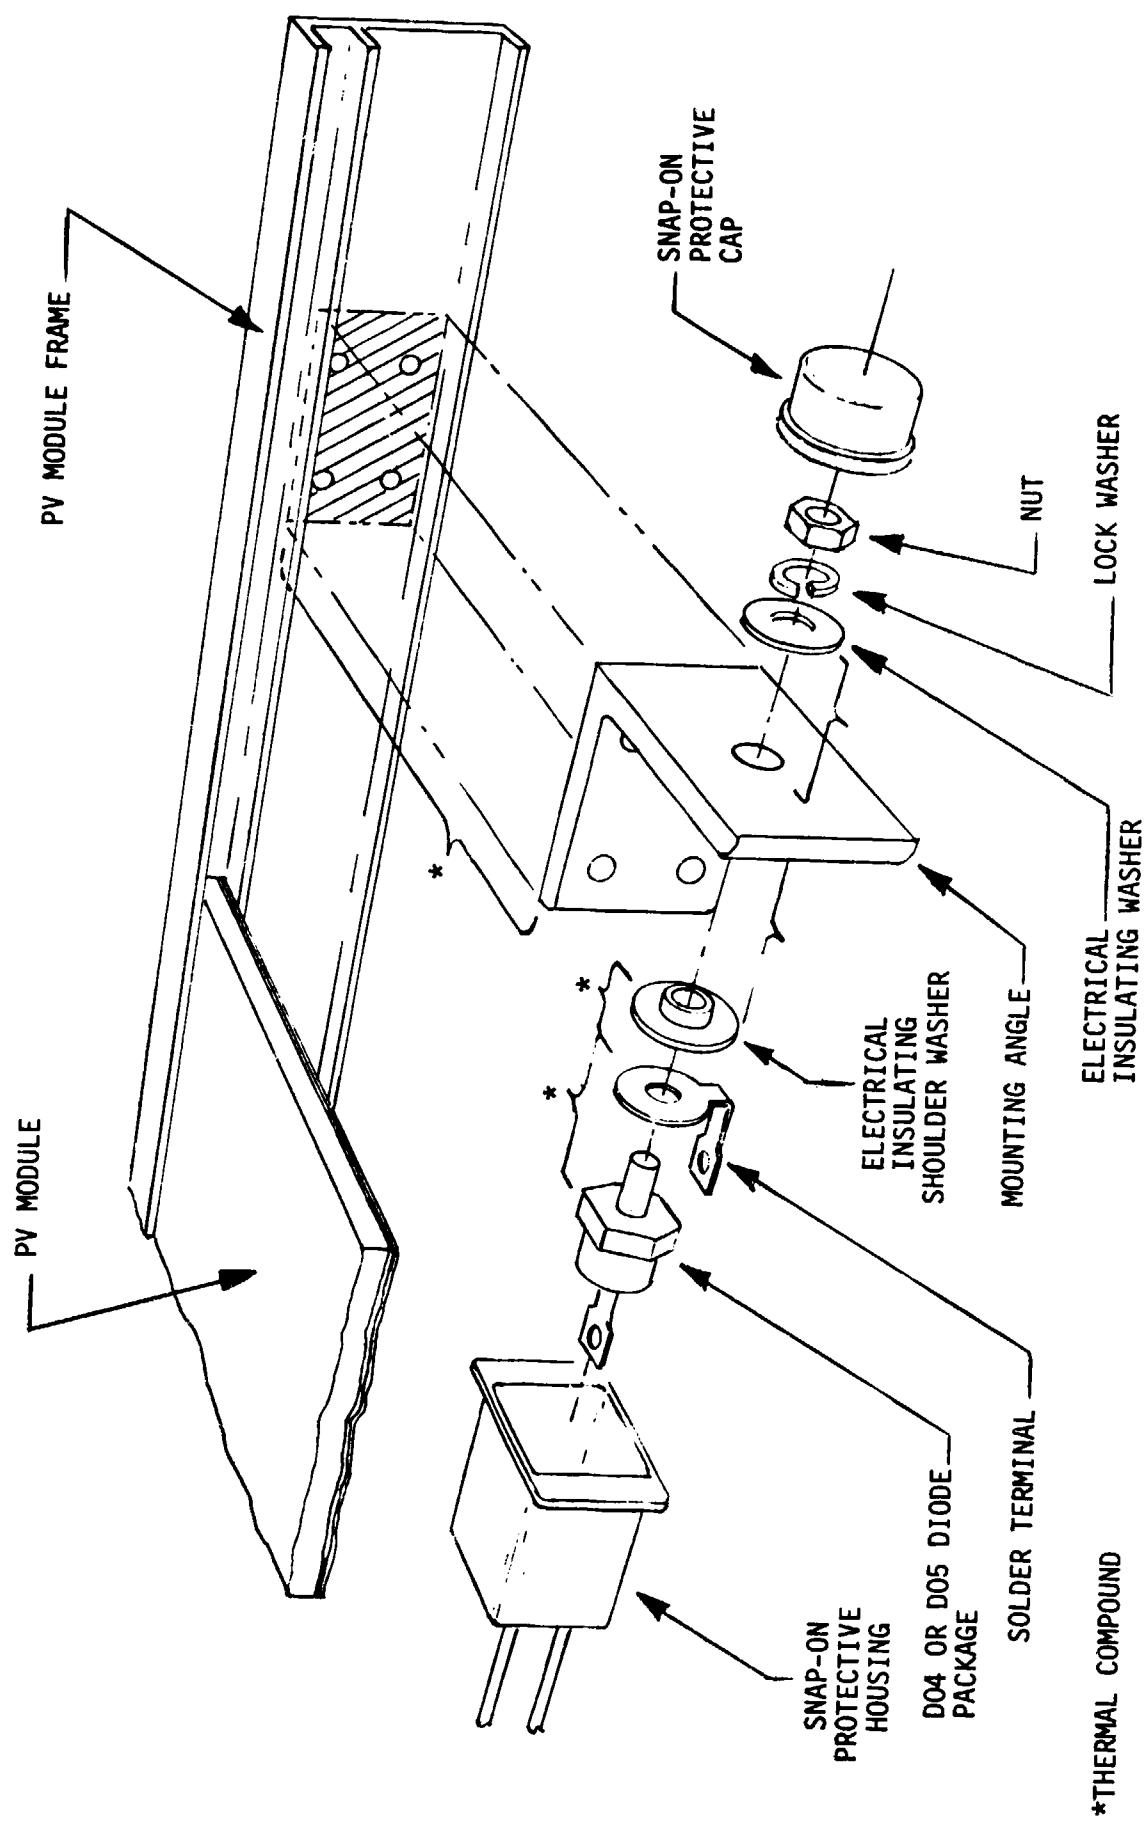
D04 or D05 Diode Package Mounted to PV Module Frame
